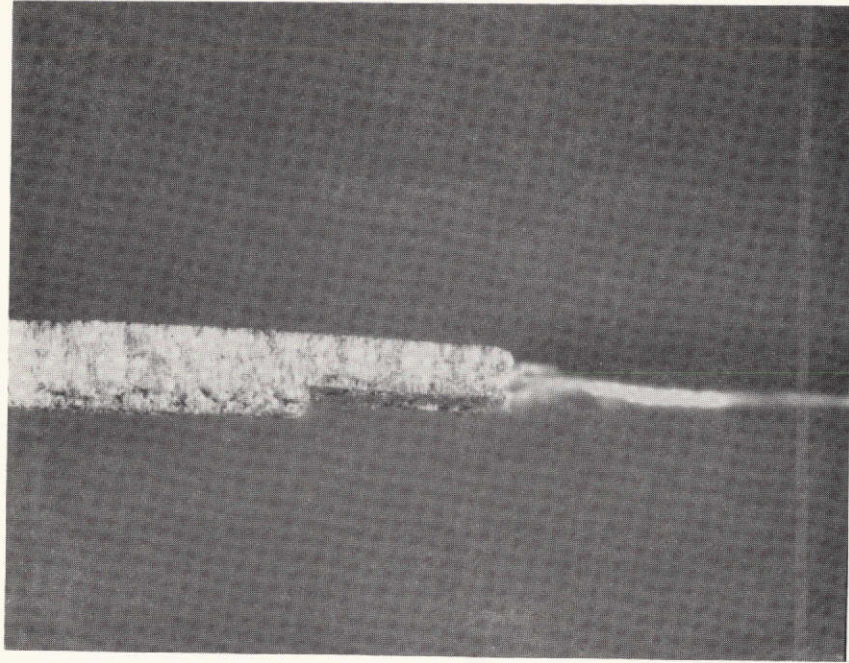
Supplier A Profile of Trimmed Coined Top Edge, Showing Taper Removed (10X)
